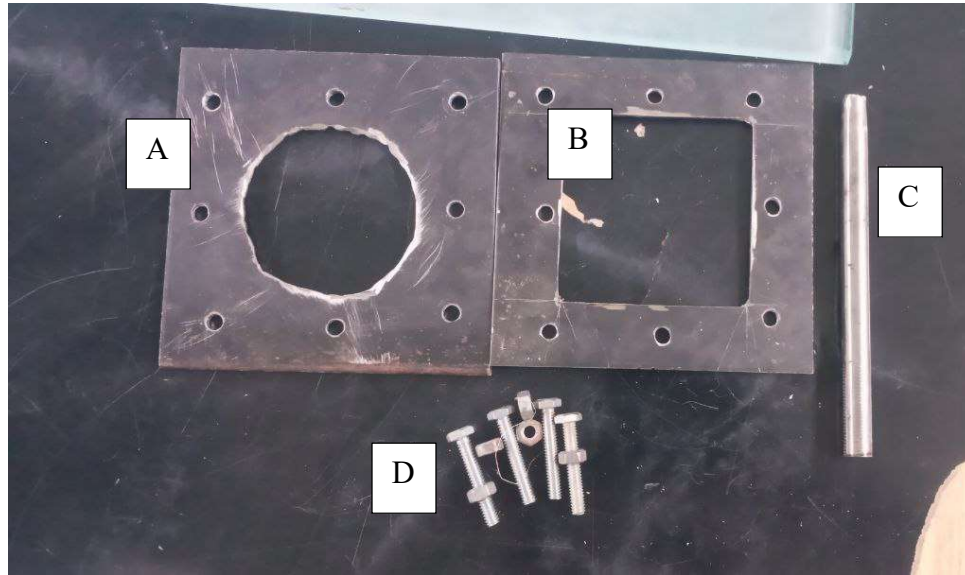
quasi static penetration test fixture (A) Lower support, (B) Upper support, (C) indenter rod, and (D) 11M bolts
